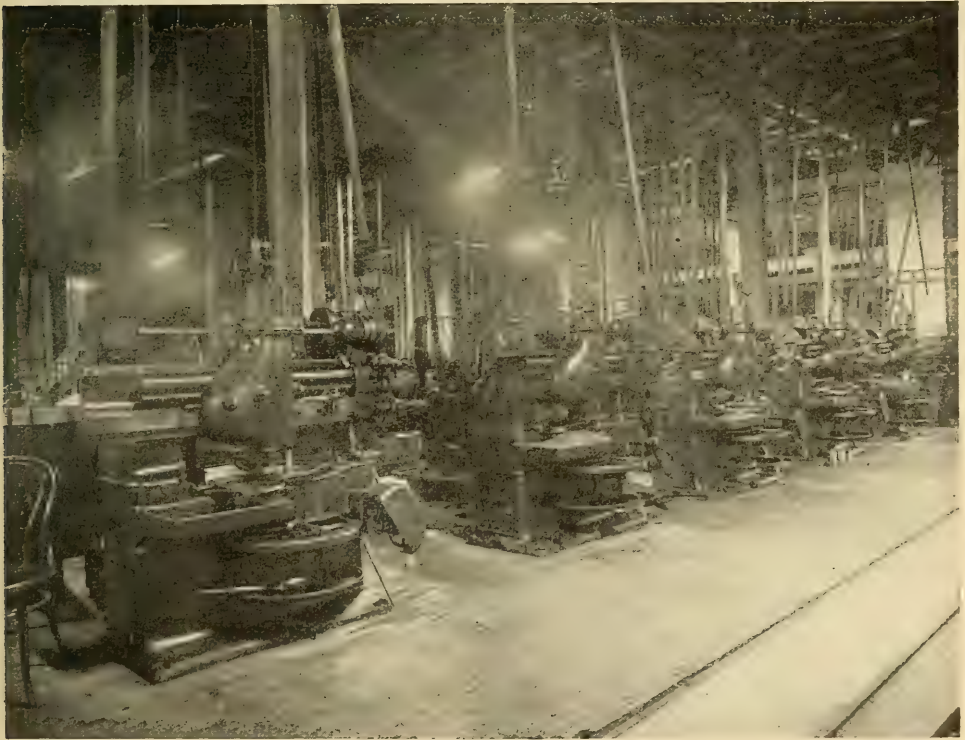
COOPER HEWITT ILLUMINATION, GEAR CUTTING DEPARTMENT, LOZIER MOTOR CAR COMPANY, DETROIT.
